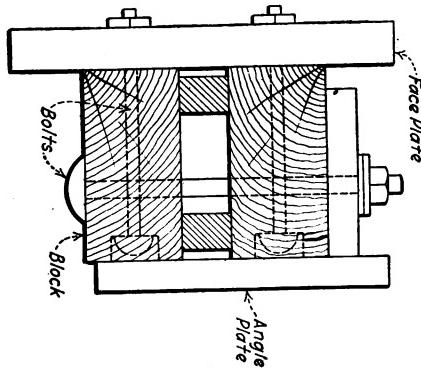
How the bolts are placed for holding the angle plate to the face plate
